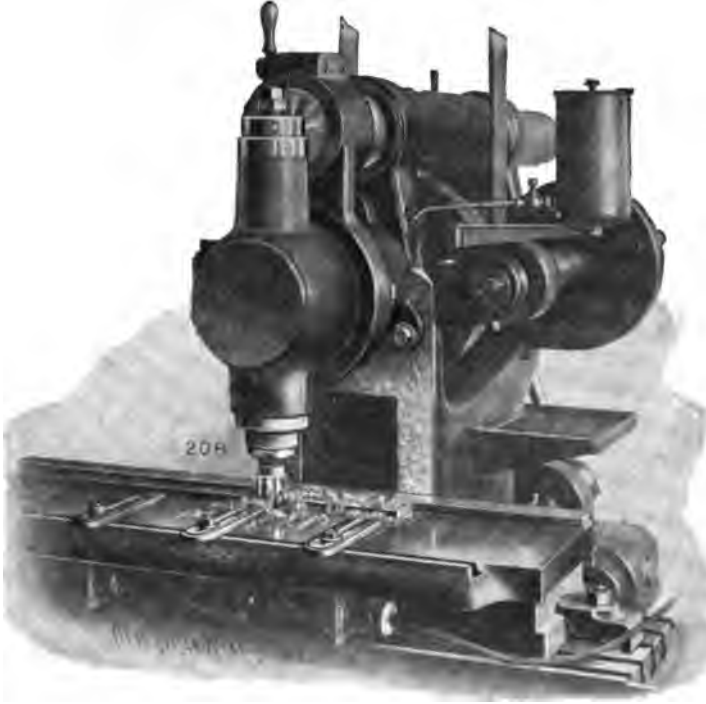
End milling. Use of magnetic chuck for quickly clamping and securely holding work. Courtesy Cincinnati Milling Machine Company.
